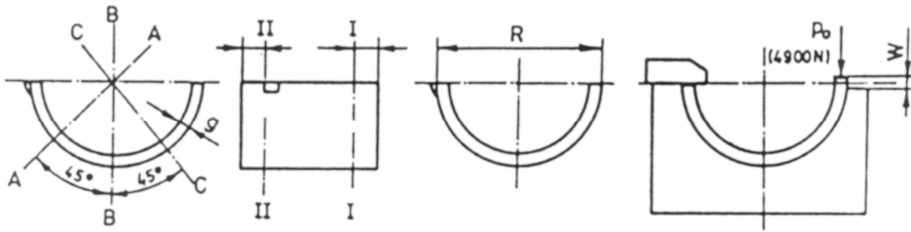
Half-bearing standard measurement before and after testing on the MWO machine: g – bearing shell thickness, R – spread, w – overlap
